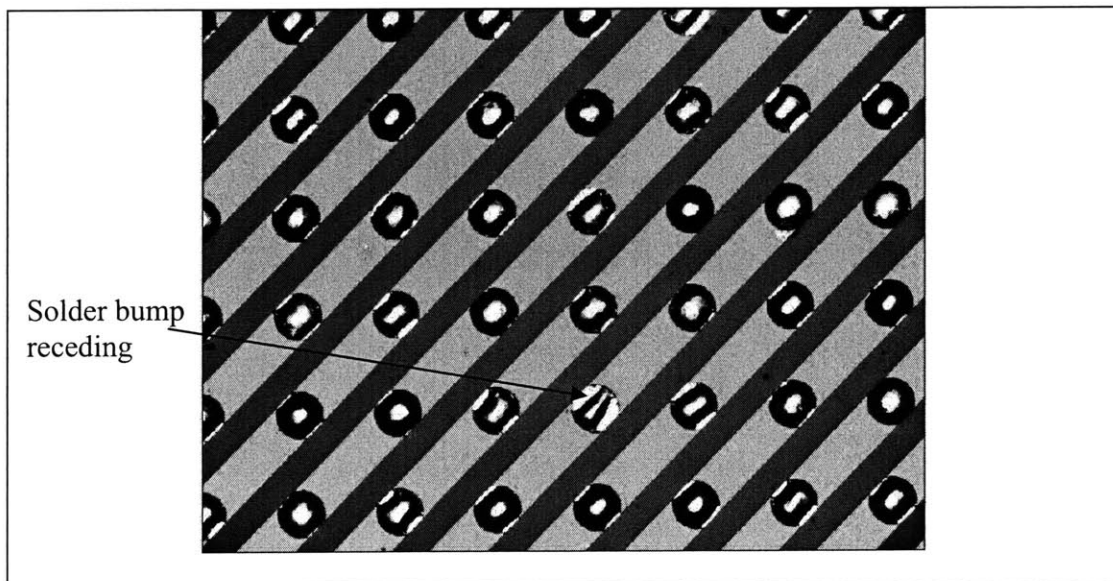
Solder bumps receding after 15 minutes in solder bath at 85°C
